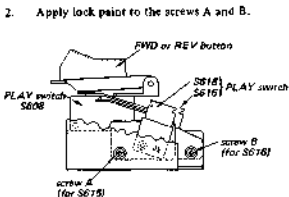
PLAY switch (S615, 616) position adjustment
